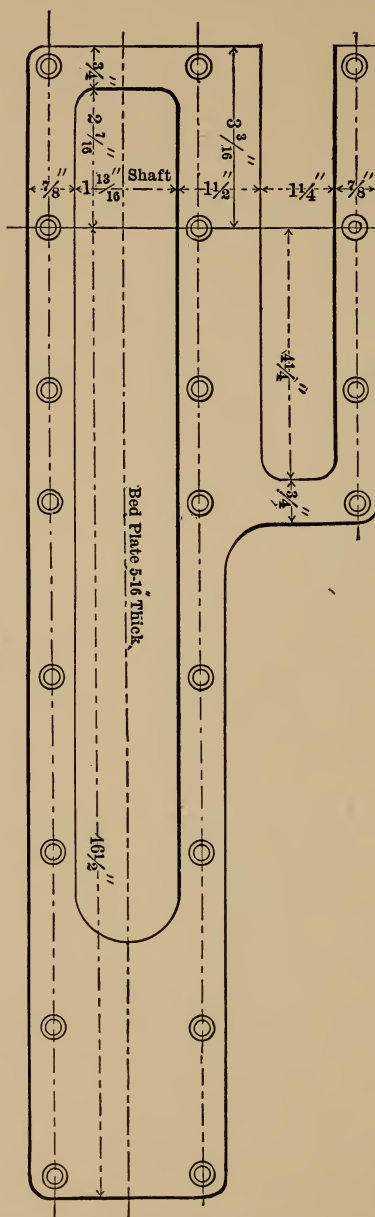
BED-PLATE OF HORIZONTAL ENGINE.
